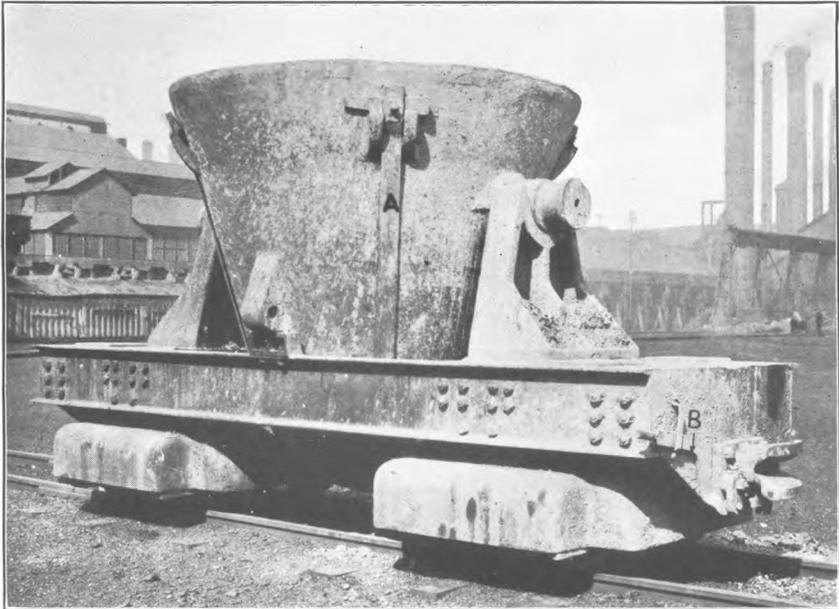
AUTOMATIC COUPLER ON CINDER LADLE CAR.
